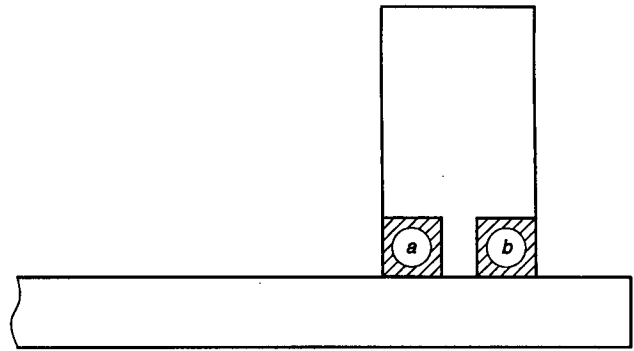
Example 2: welding of ring stiffener close to end of pipe. Two weld passes are used.
